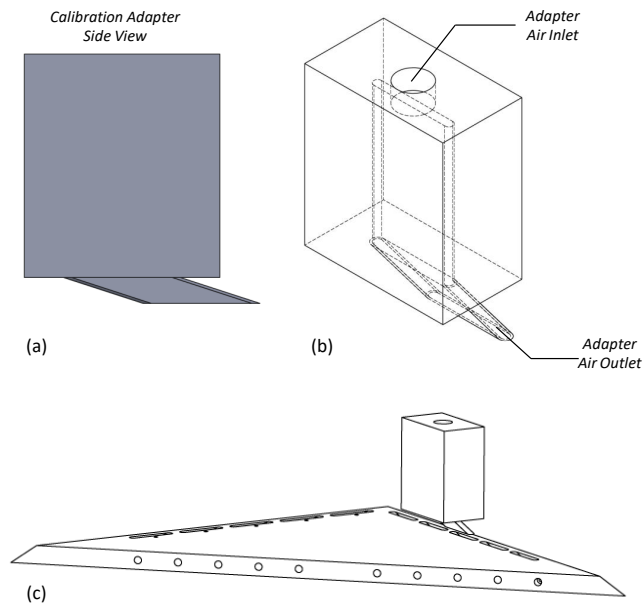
Bleed calibration adapter CAD model: (a) Side view, (b) Iso-view with details, (c) Adapter – wing assembly.
